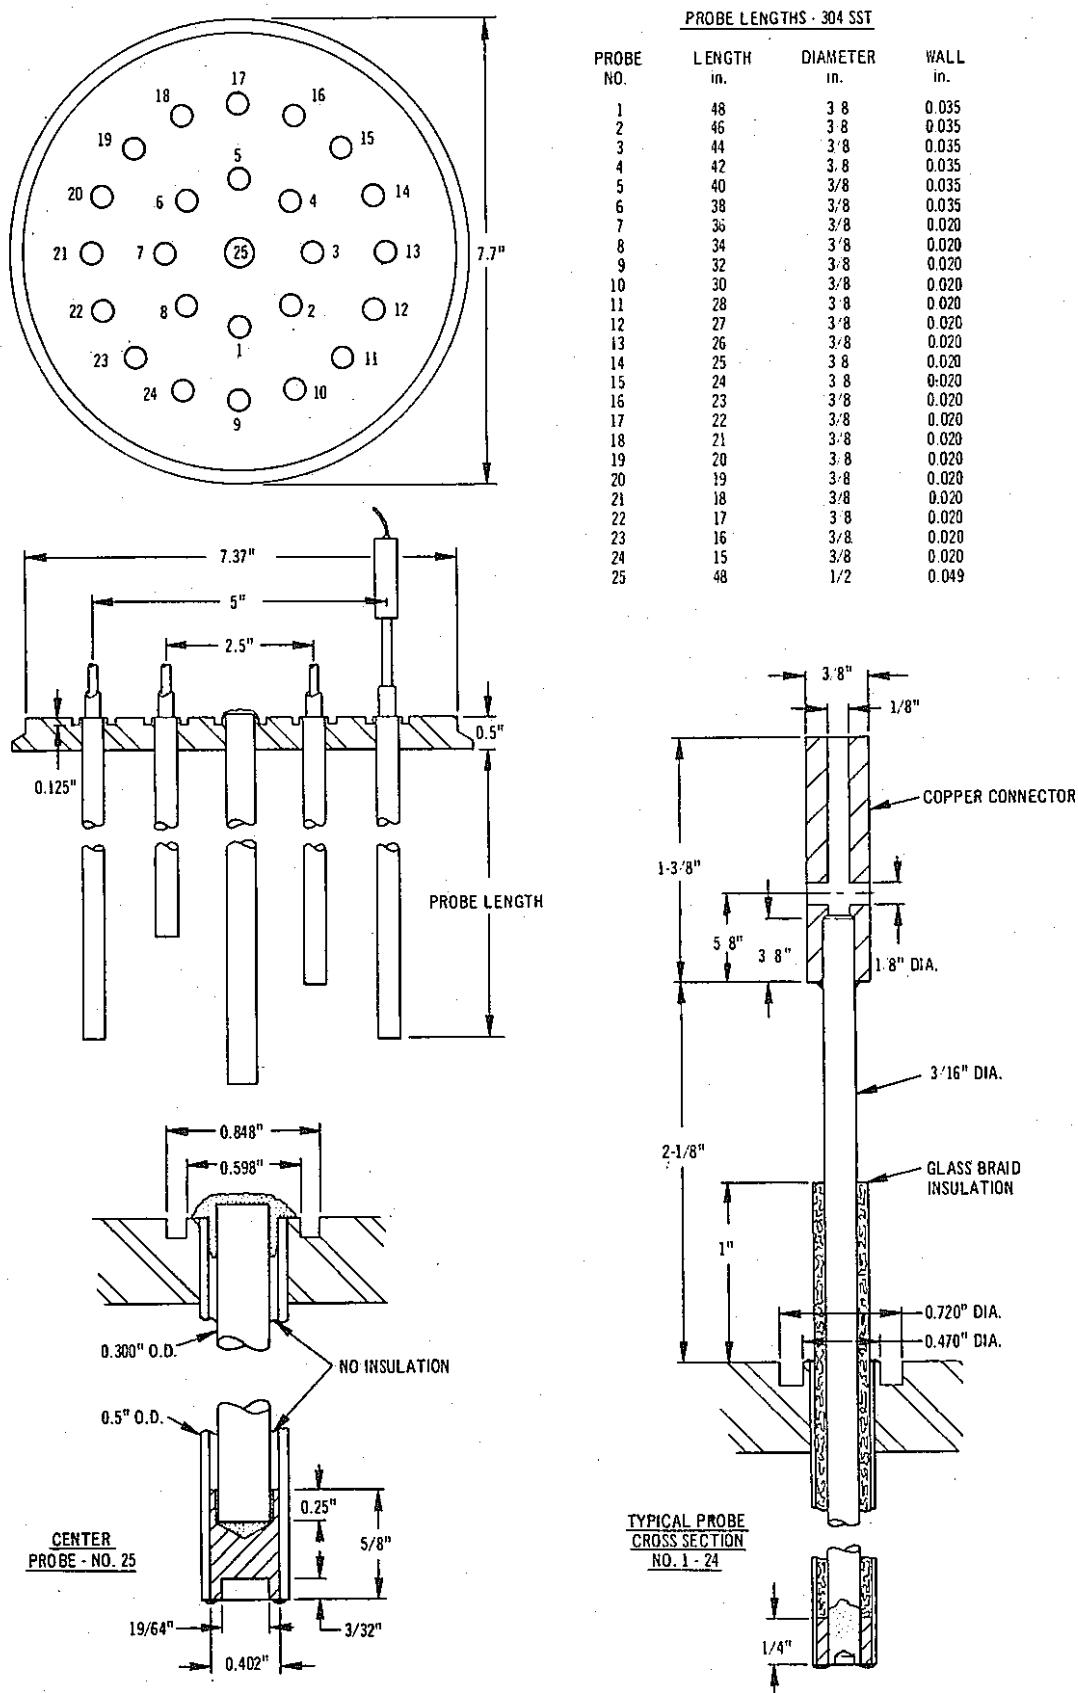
Primary Tank Spiral Resistance Probe Assembly
